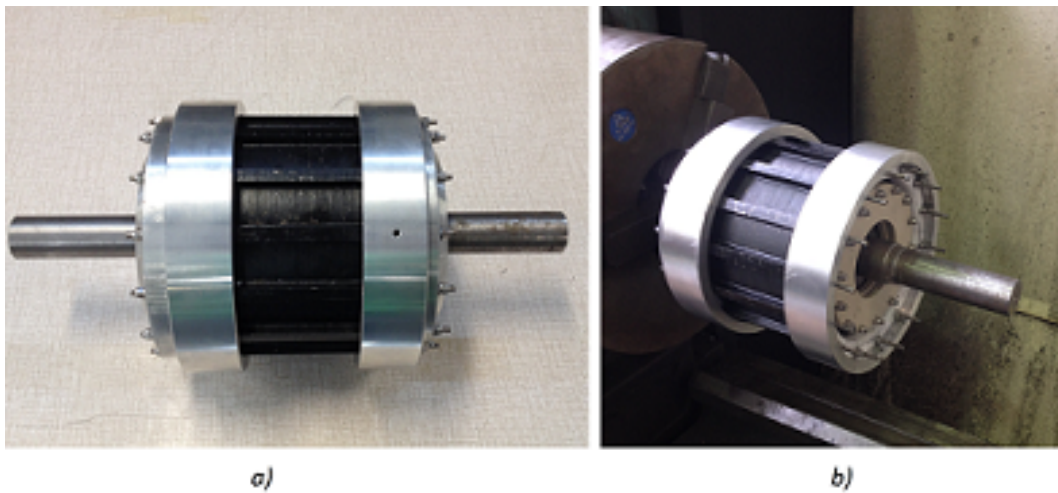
Complete MG assembly (a) side view (b) MG assembly with HS casing removed showing the working position of an alignment ring
